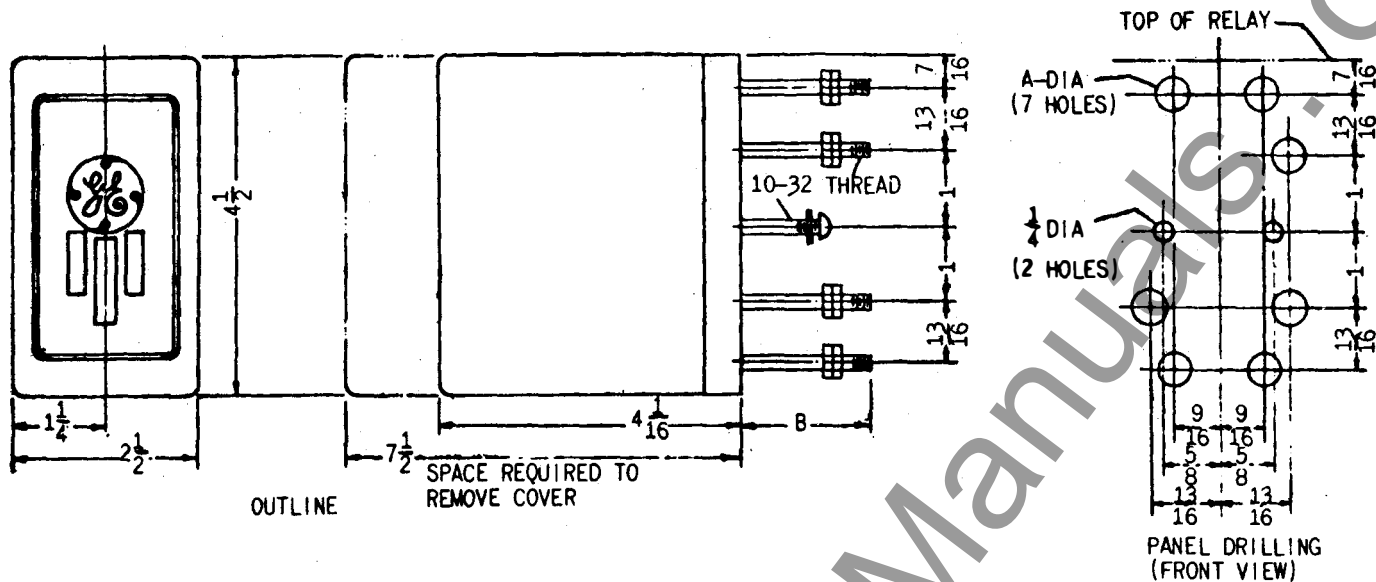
Outline and Panel Drilling Diagram for HGA14BB Relay (Surface Mounted)
